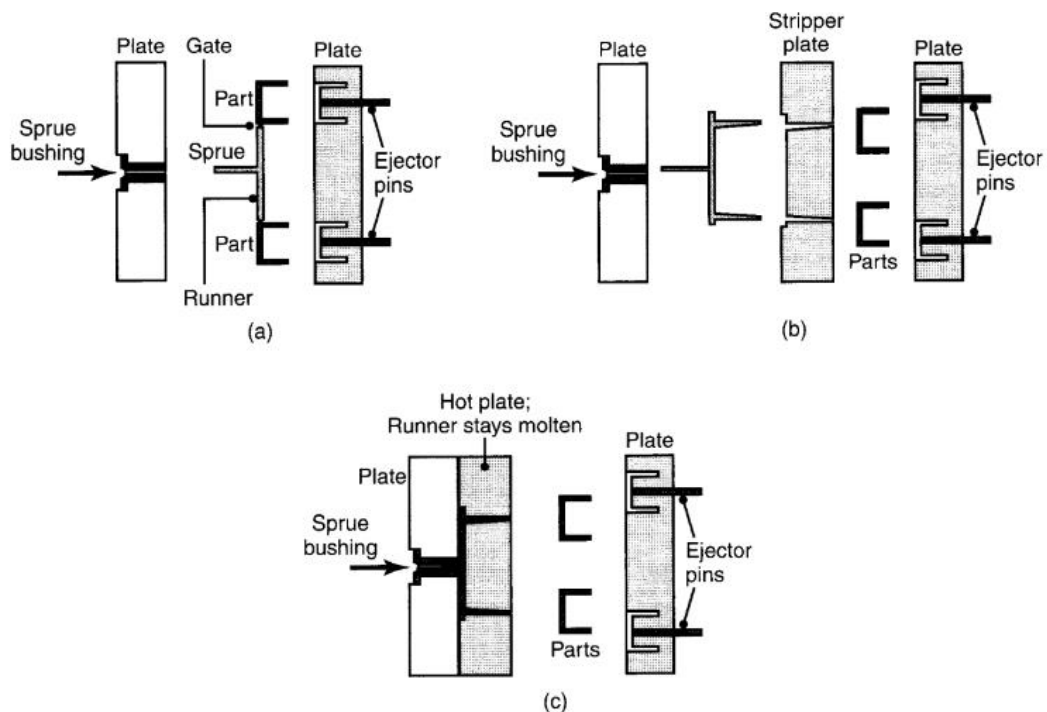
Basic injection mold types: (a) two-plate mold, (b) three-plate mold and (c) hot-runner mold. (Kalpakjian, et al., 2010 p. 496)
